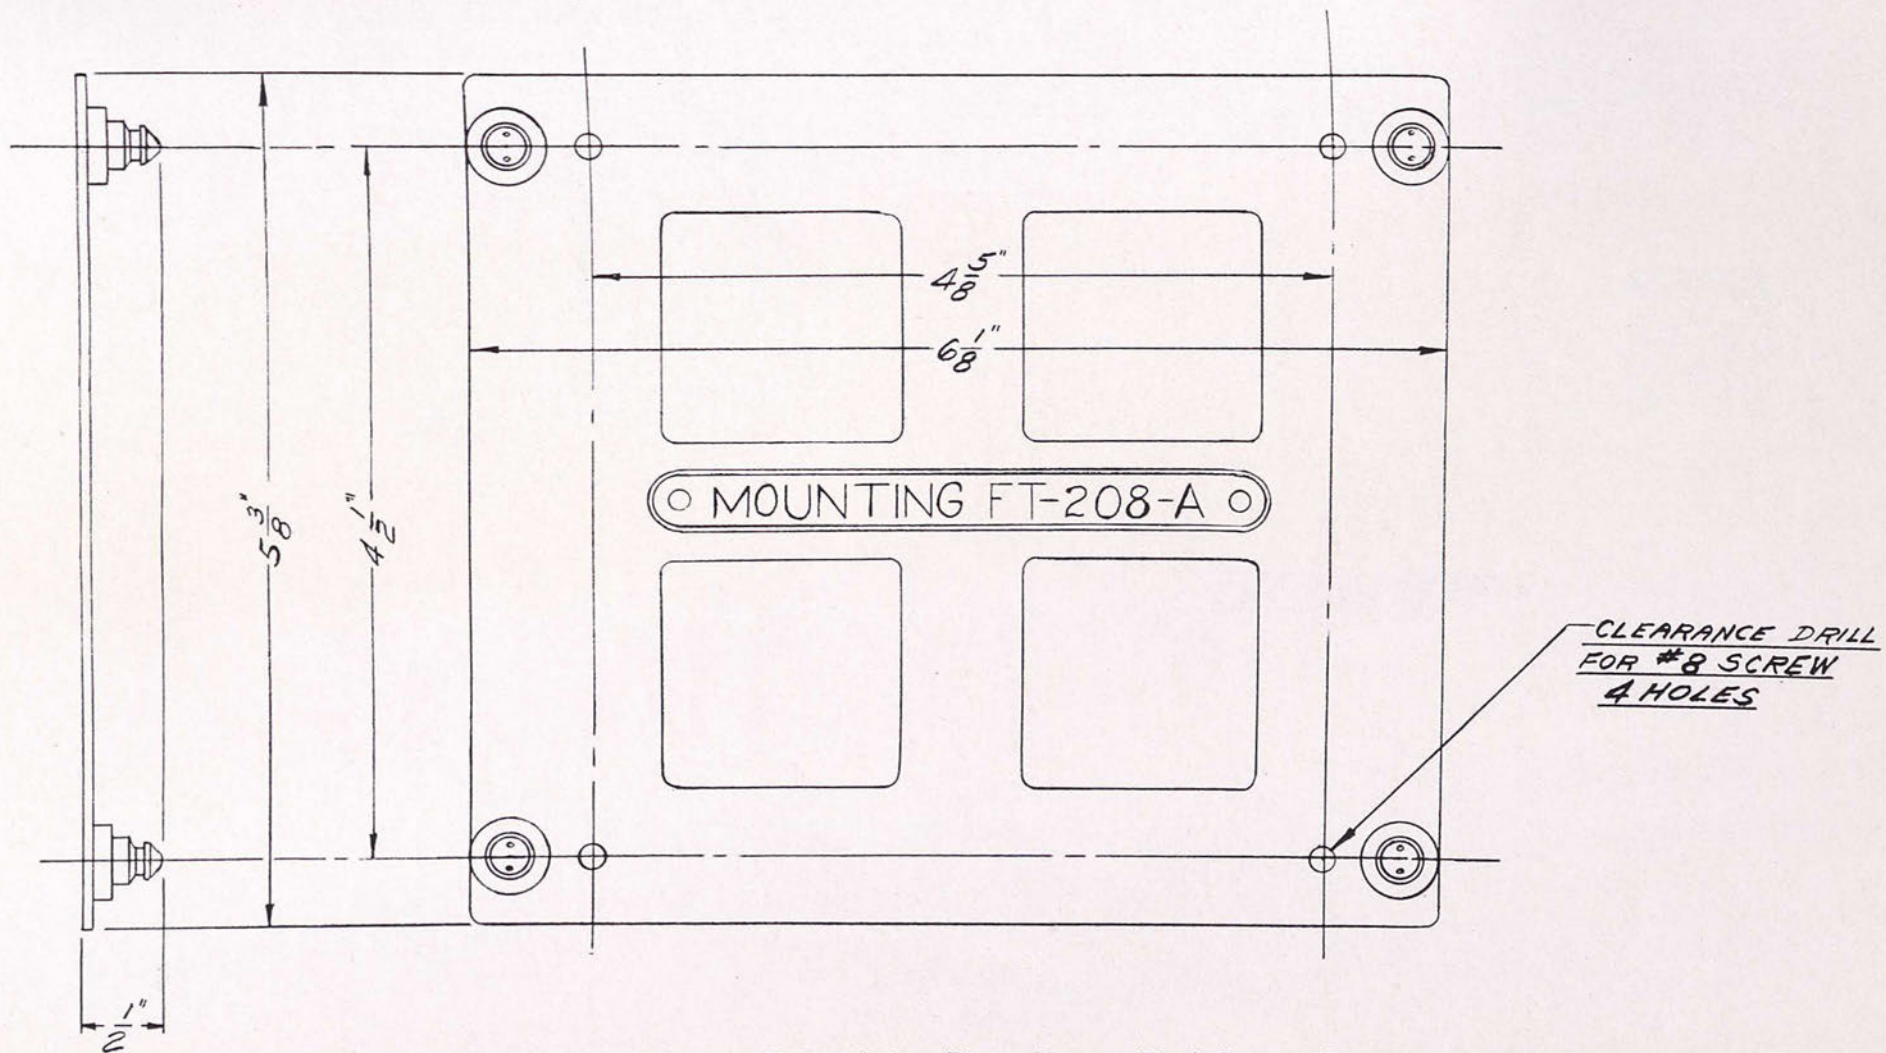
MOUNTING FT-208-A (FOR RADIO CONTROL BOX) OUTLINE DRAWING
